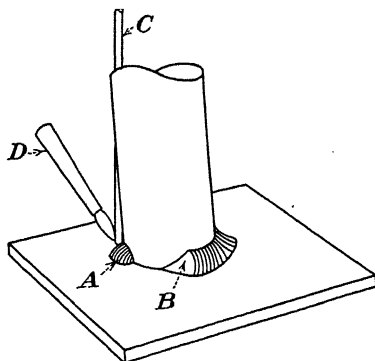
Tube and plate weld. *A*, starting end of weld; *B*, weld puddle; *C*, welding rod; *D*, welding tip.
